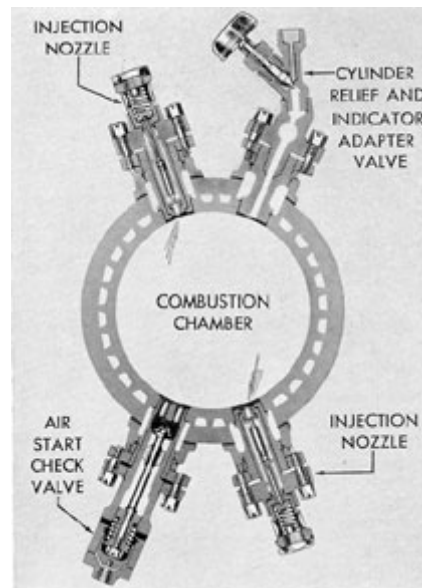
Arrangement of injection nozzles in F-M cylinder.
